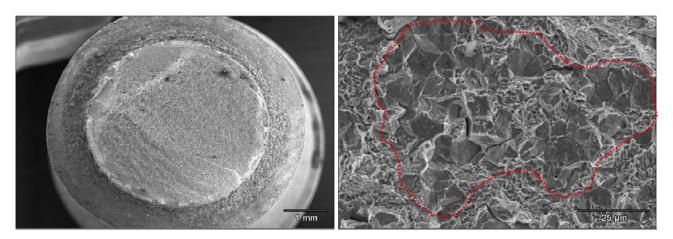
ISL test on specimen RSL HTP #006 that broke after a 72 hr. delay after Mn-P. This specimen was performed as a head-to-head test with specimen #005 (Figure 17). The left image is a low mag. SEM image of the fracture surface. The right image shows a region (within the red dotted area) that is clearly intergranular.
